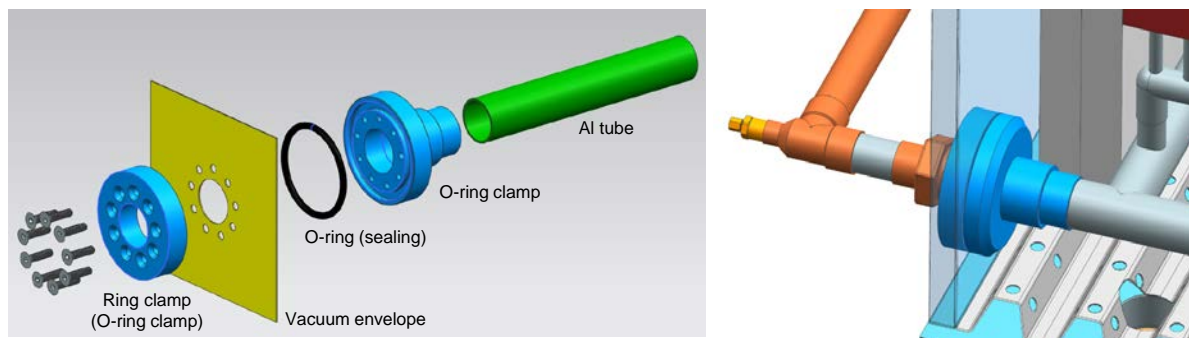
CAD view of the feed-through exploded (left) and assembly connected to the AD unit (right).
